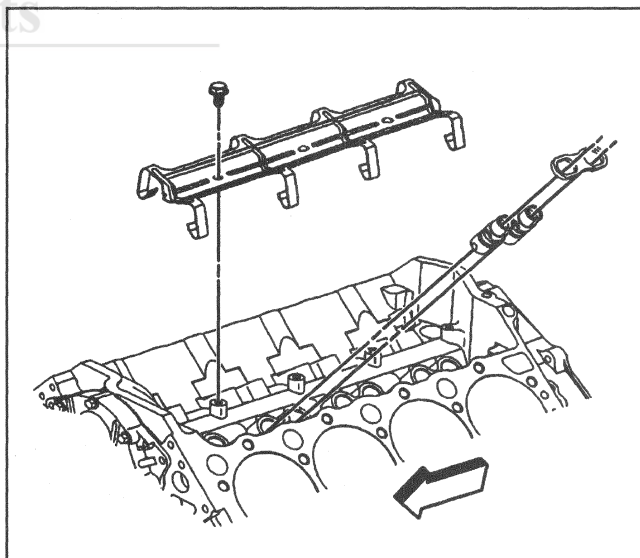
Valve Lifters, Valve Lifter Guides, and Valve Lifter Retainer
